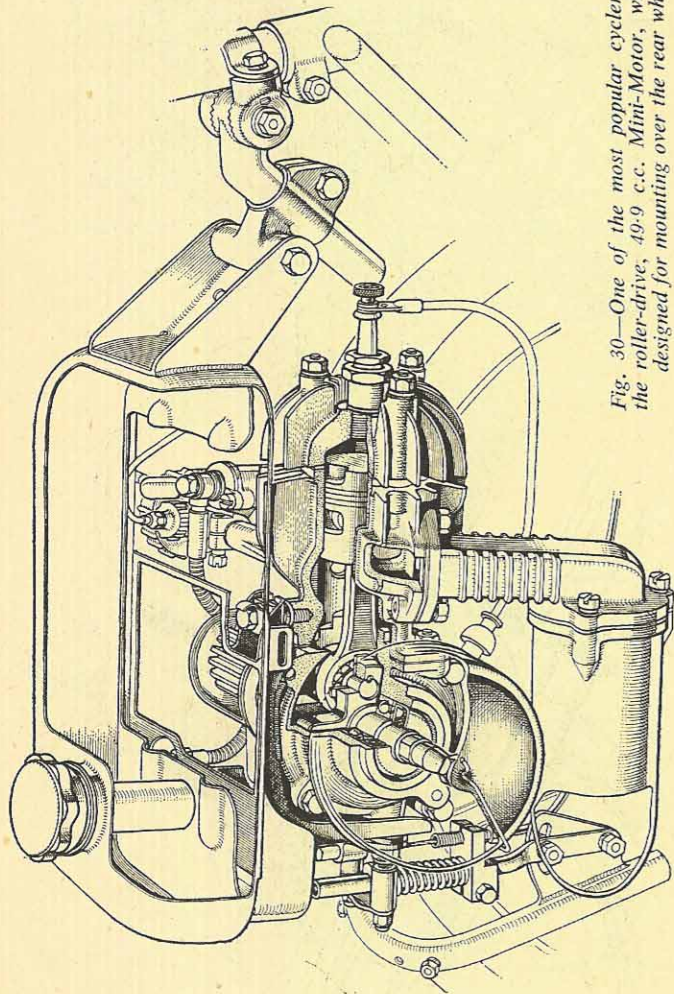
One of the most popular cyclometers, the roller-drive, 49.9 c.c. Mini-Motor, which is designed for mounting over the rear wheel
